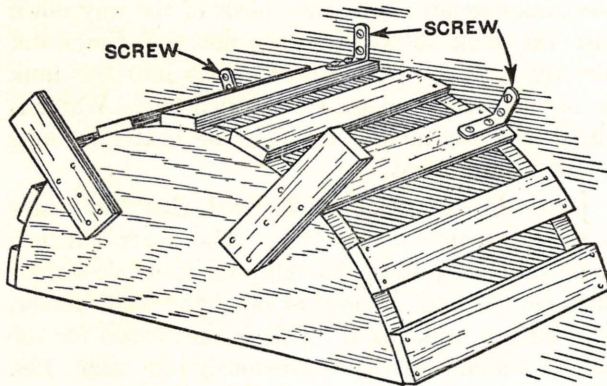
Home made hose rack for fastening to the garage wall (See Woodworking, page 23)
